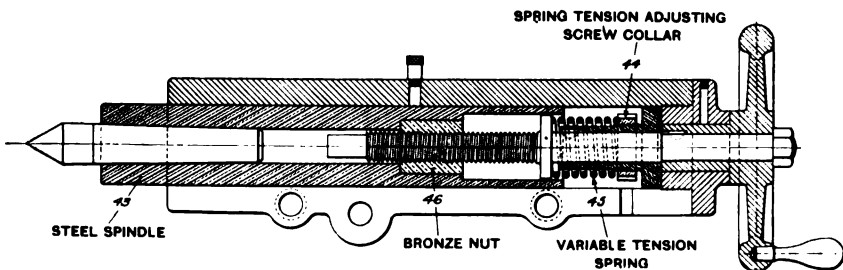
Section Through Footstock, Medium and Large Universal and Plain Machines except Nos. 31 to 37
